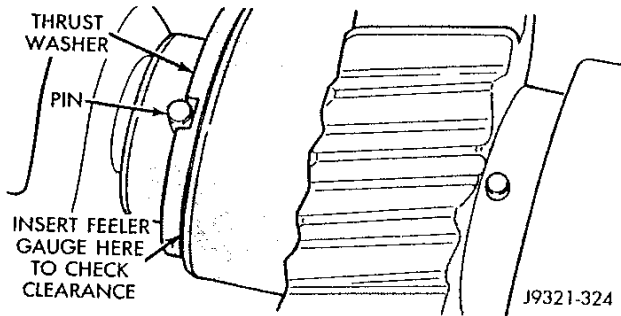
Checking Idler Gear Thrust Washer Clearance
